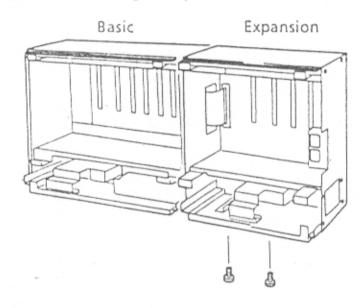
Attaching the Expansion KSU to the Basic KSU
